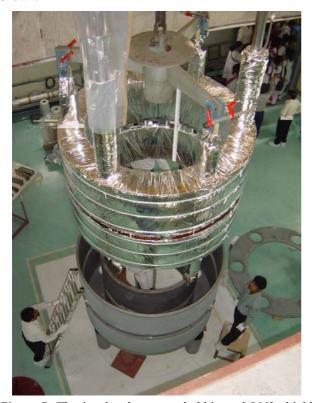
The insulated cryostat bobbin and LN2 shield assembly is being installed within the iron vacuum chamber (Coil Tank).
